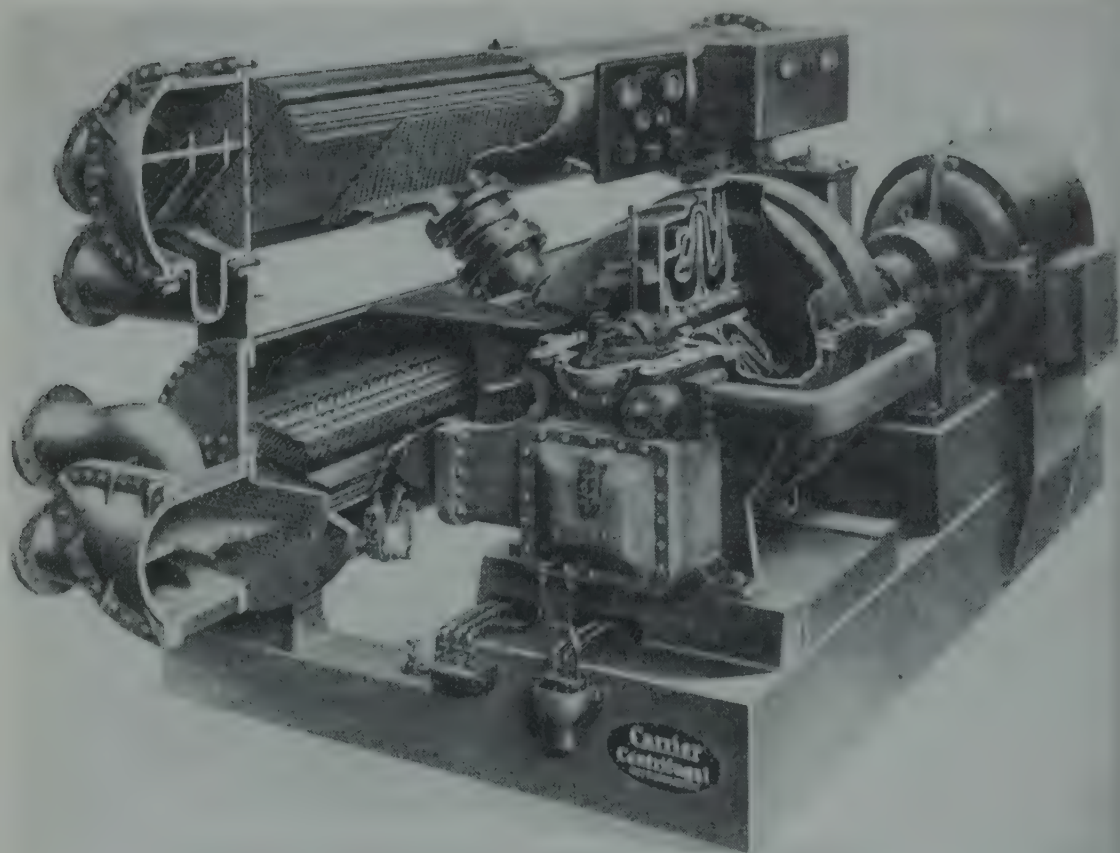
Carrier Centrifugal Compressor—Broken Section.
